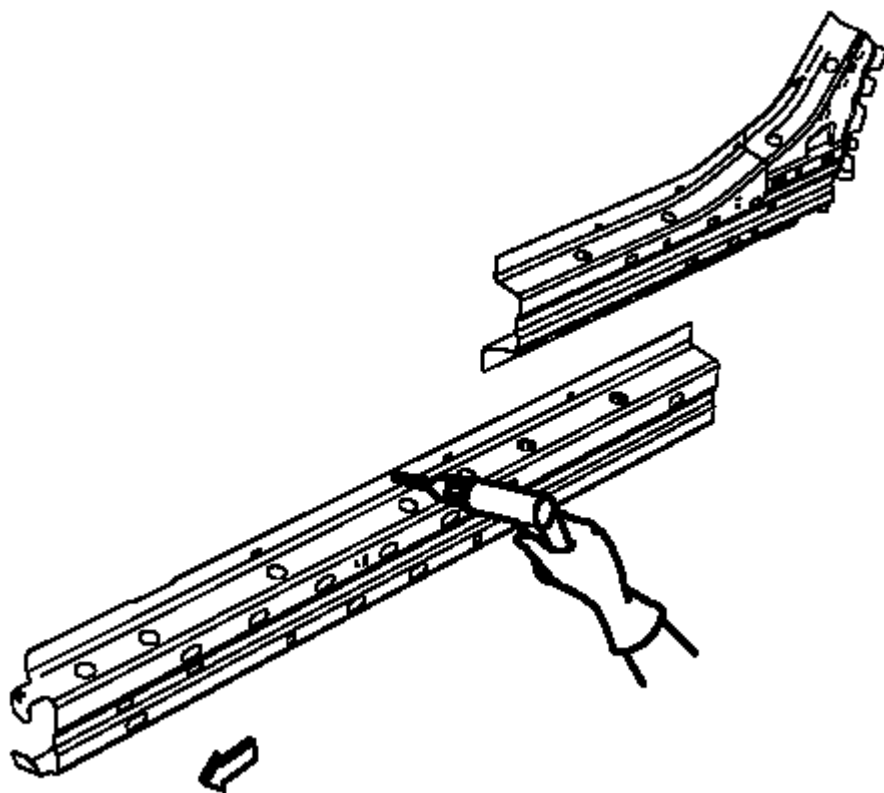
Drilling 8 Mm (5/16 In) For Plug Welding Along Edges Of Body Side Outer Panel Reinforcement
